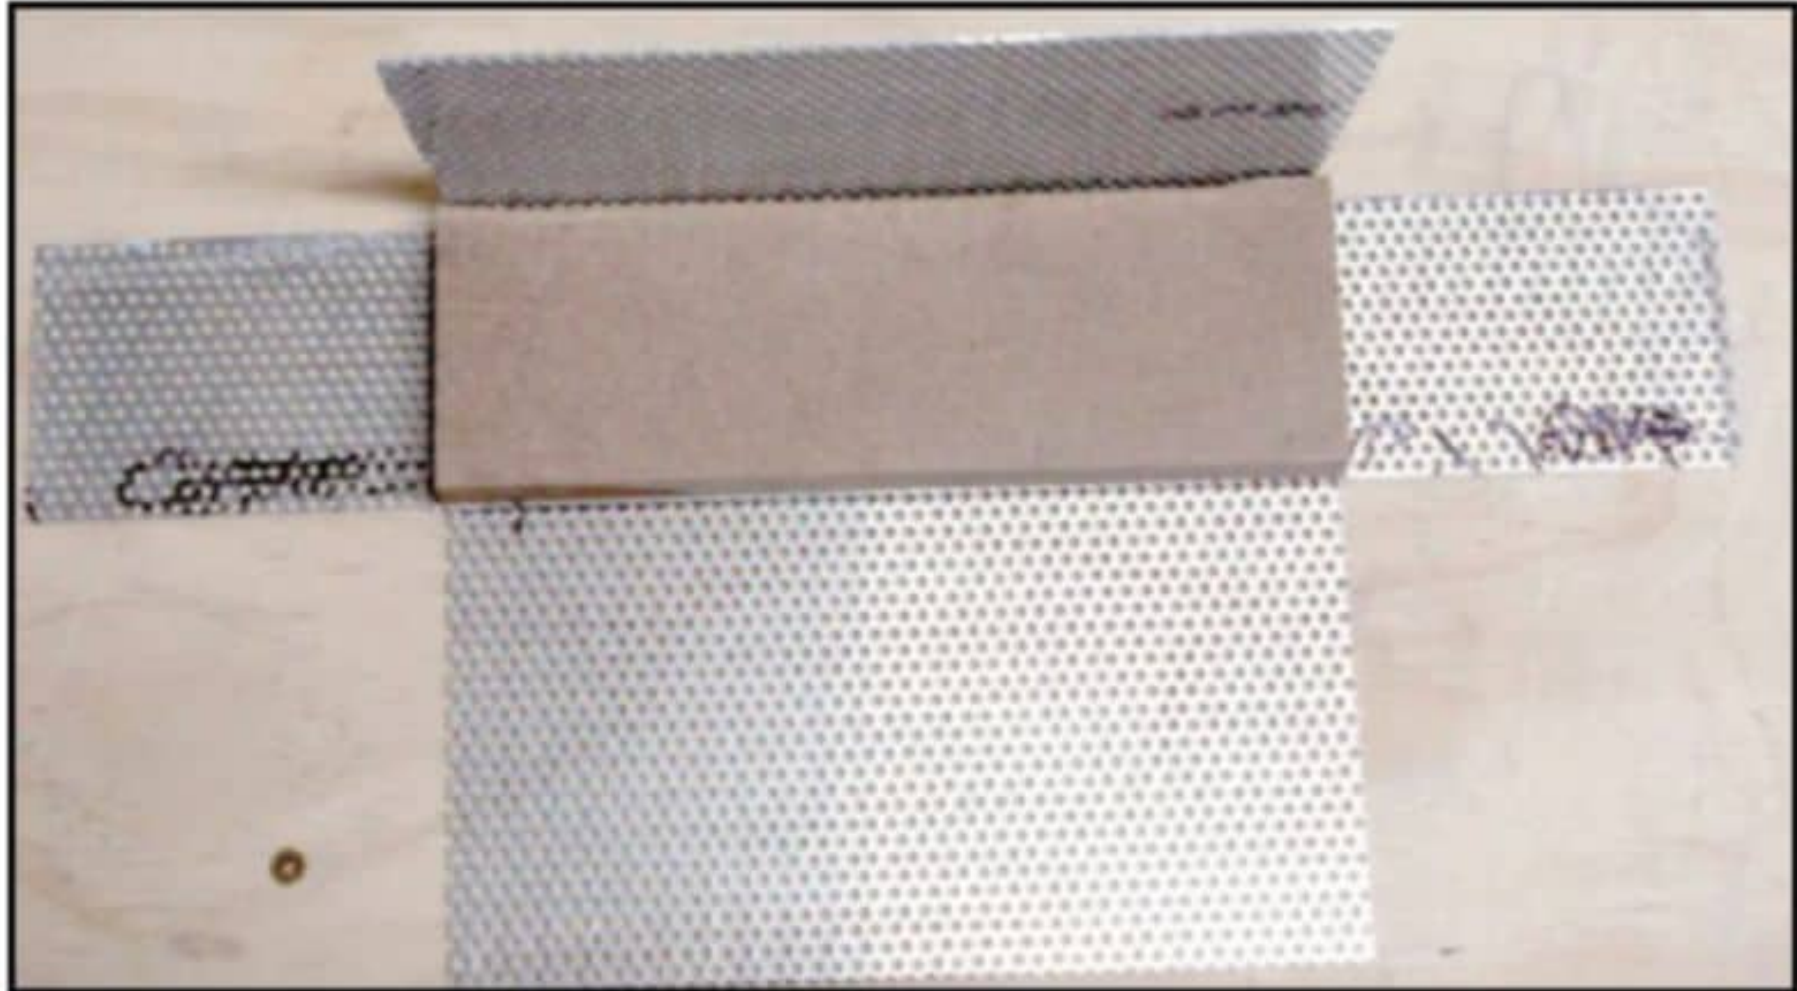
After deciding on the dimensions for the tube cage, I laid out a pattern on the material and cut it to shape.
